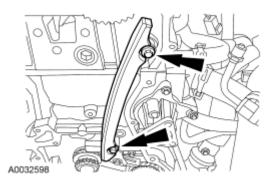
Locating Timing Chain Courtesy of FORD MOTOR CO.
